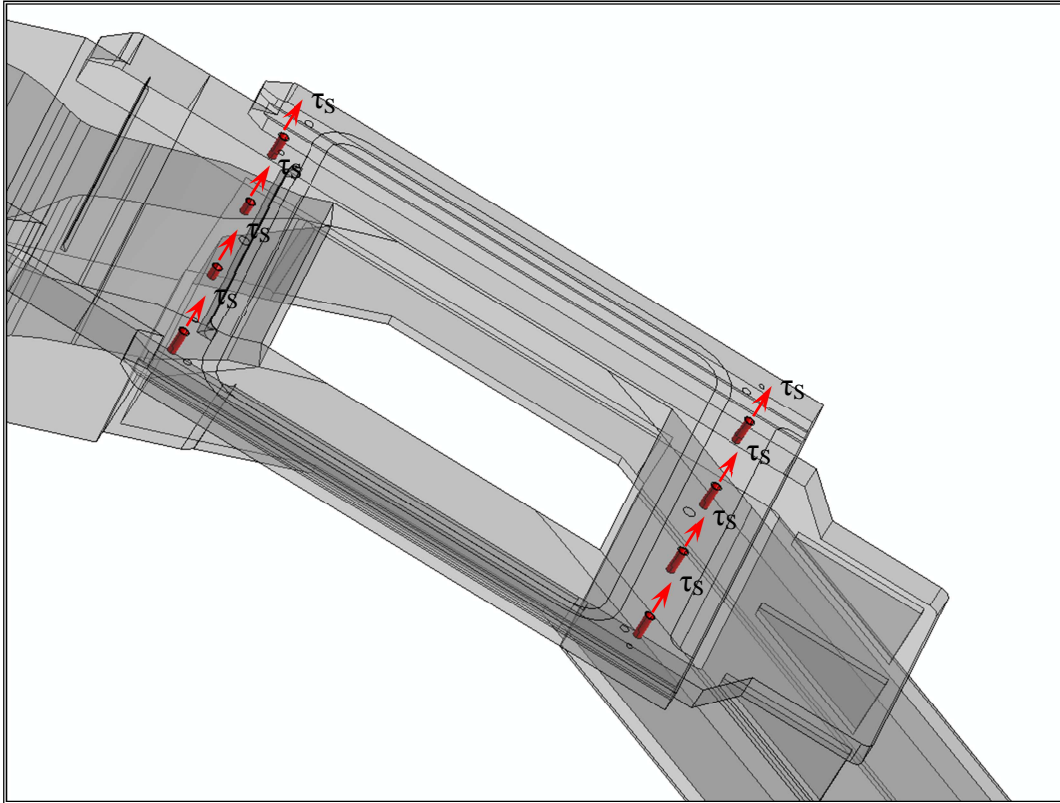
Shear stress τ_s along lateral surfaces of frame threaded holes.
